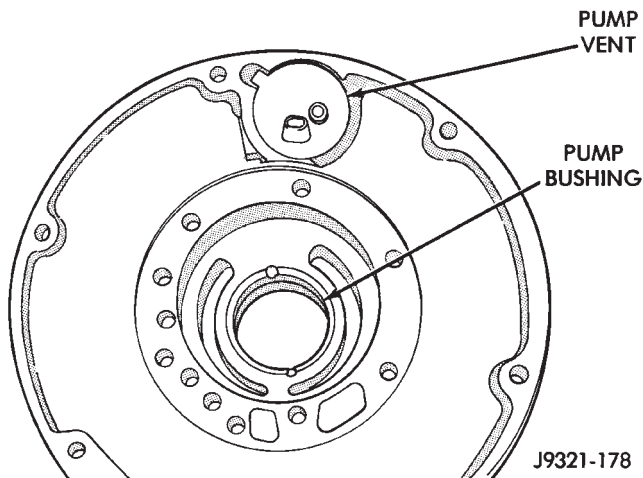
Oil Pump And Reaction Shaft Components (46RH)
